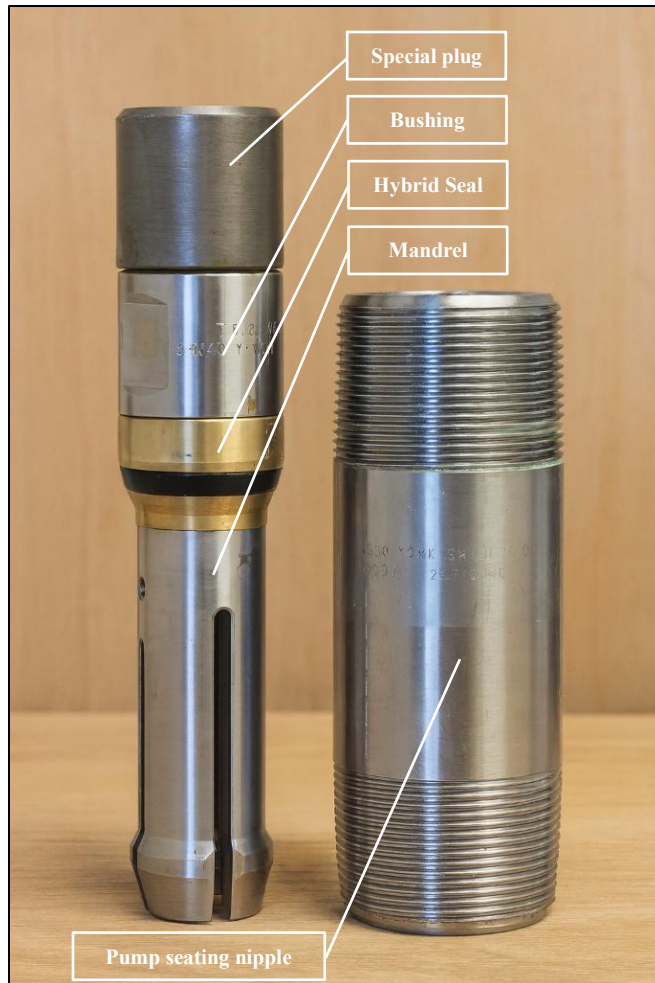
Mechanical bottom lock with hybrid seal assembly.
